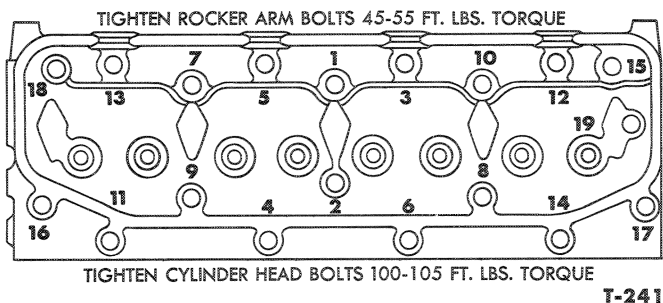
Cylinder Head Tightening Sequence (Diesel)
